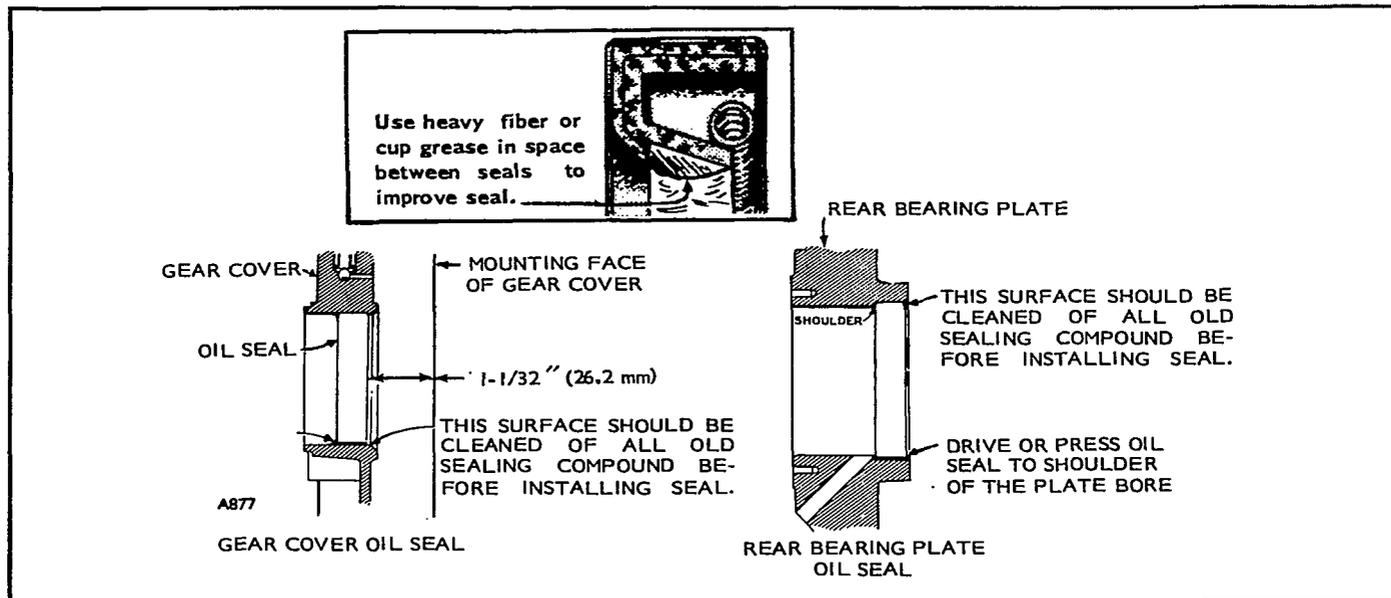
GEAR COVER AND REAR BEARING PLATE OIL SEALS
